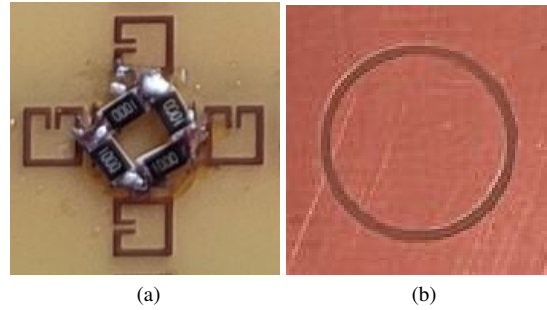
Enlarged view of unit cell of the fabricated Rasorber (a) Top layer (b) Bottom layer.
